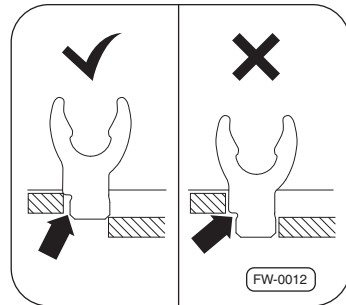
· Wear checks of the fifth wheel lock and wear ring
